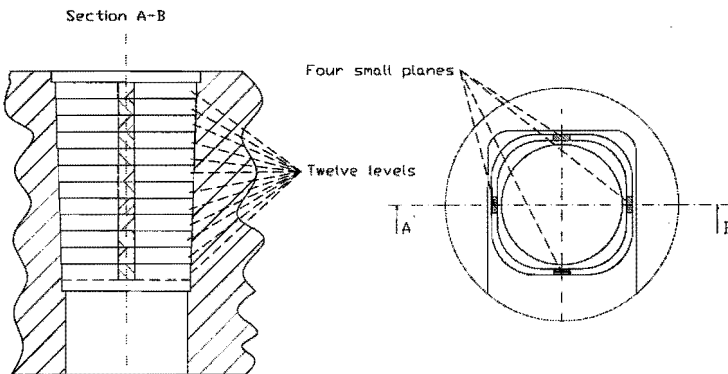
Detailed view of one hole, milled in the test workpiece.
